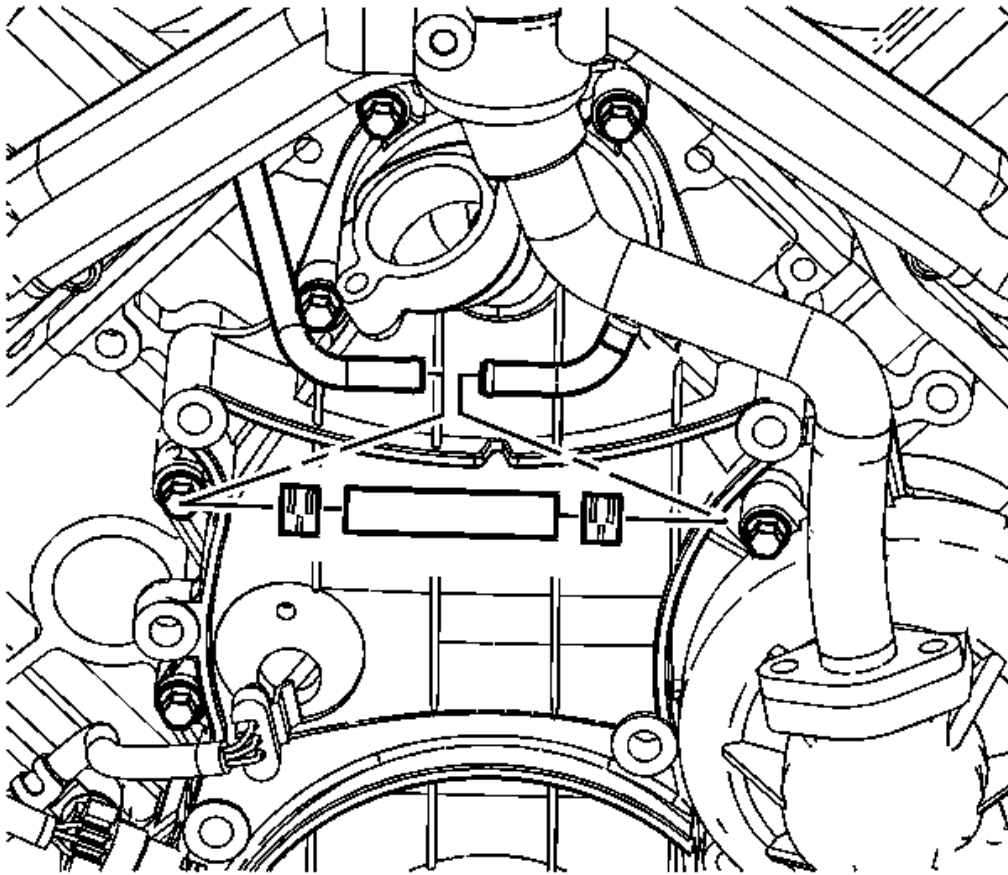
View Of Fuel Line Bracket Bolt & Thermostat Housing Crossover (6.6L LMM)
